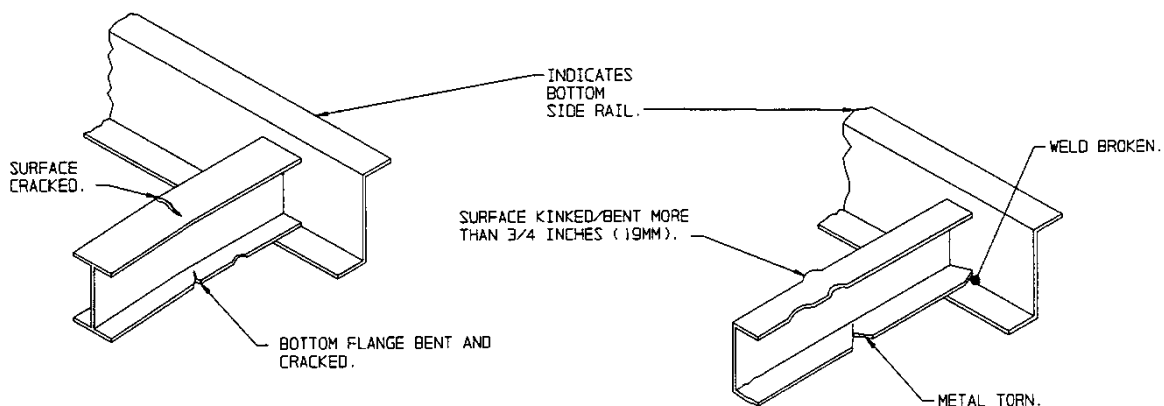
C - UNACCEPTABLE CROSS MEMBER DAMAGE
